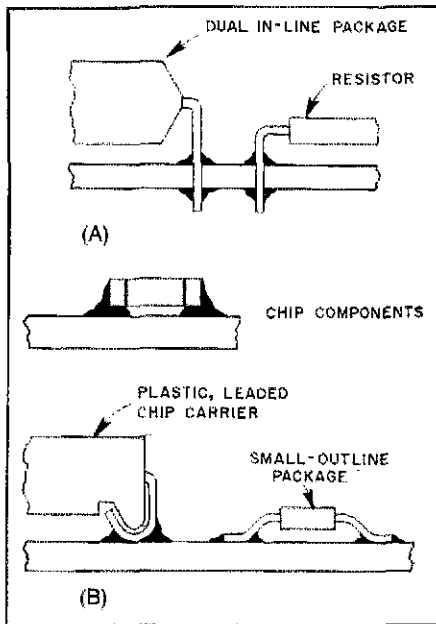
For years, the through-hole mounting of leaded components (A) has been common. Surface-mounting techniques (B) with leadless chip components and miniature IC packages are now being used in volume board assemblies.
